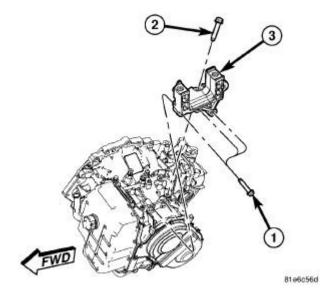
Transmission Mount Bolts Courtesy of CHRYSLER LLC
